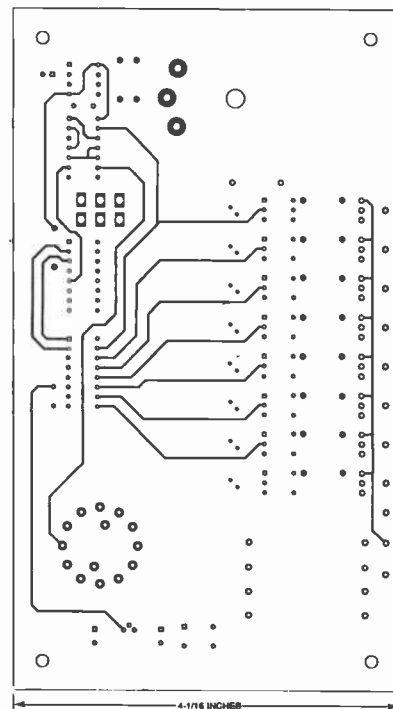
Here's a 50% reduction of the component side of the double-sized PC board.
